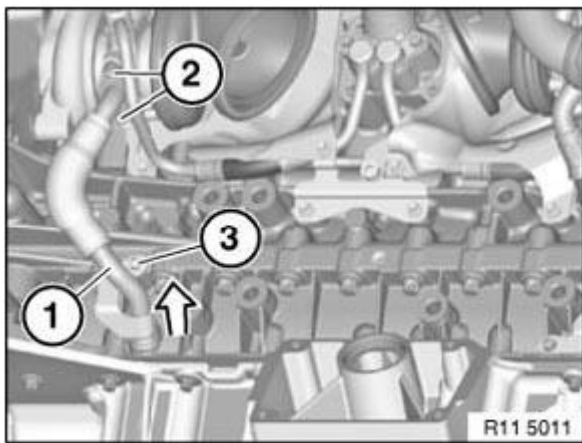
Identifying Screws, Bolt And Oil Return Line
